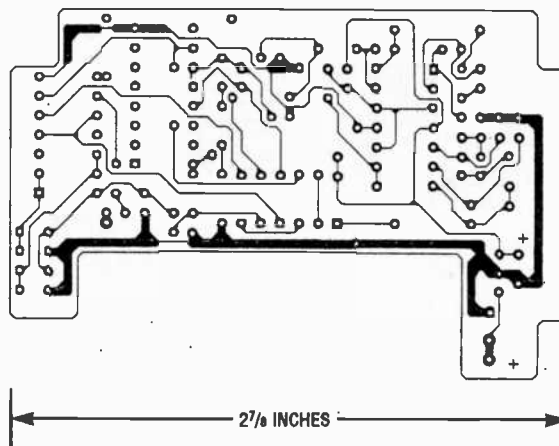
The final version of the circuit was assembled on a printed-circuit board, measuring about 3 x 2 inches. A template of that layout is shown here full size.
